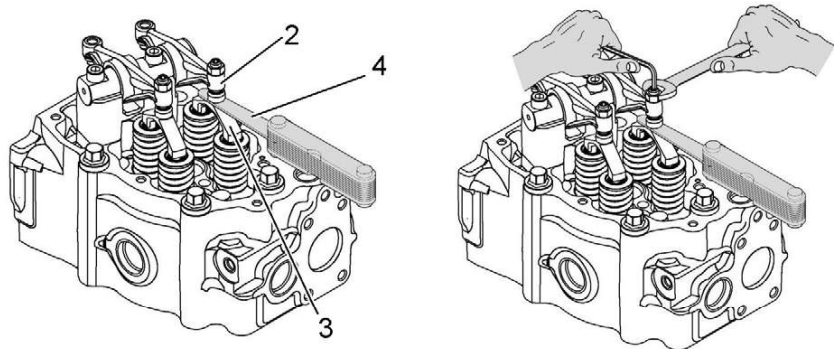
Check and adjust exhaust valve clearance of 0,40 mm - cold
